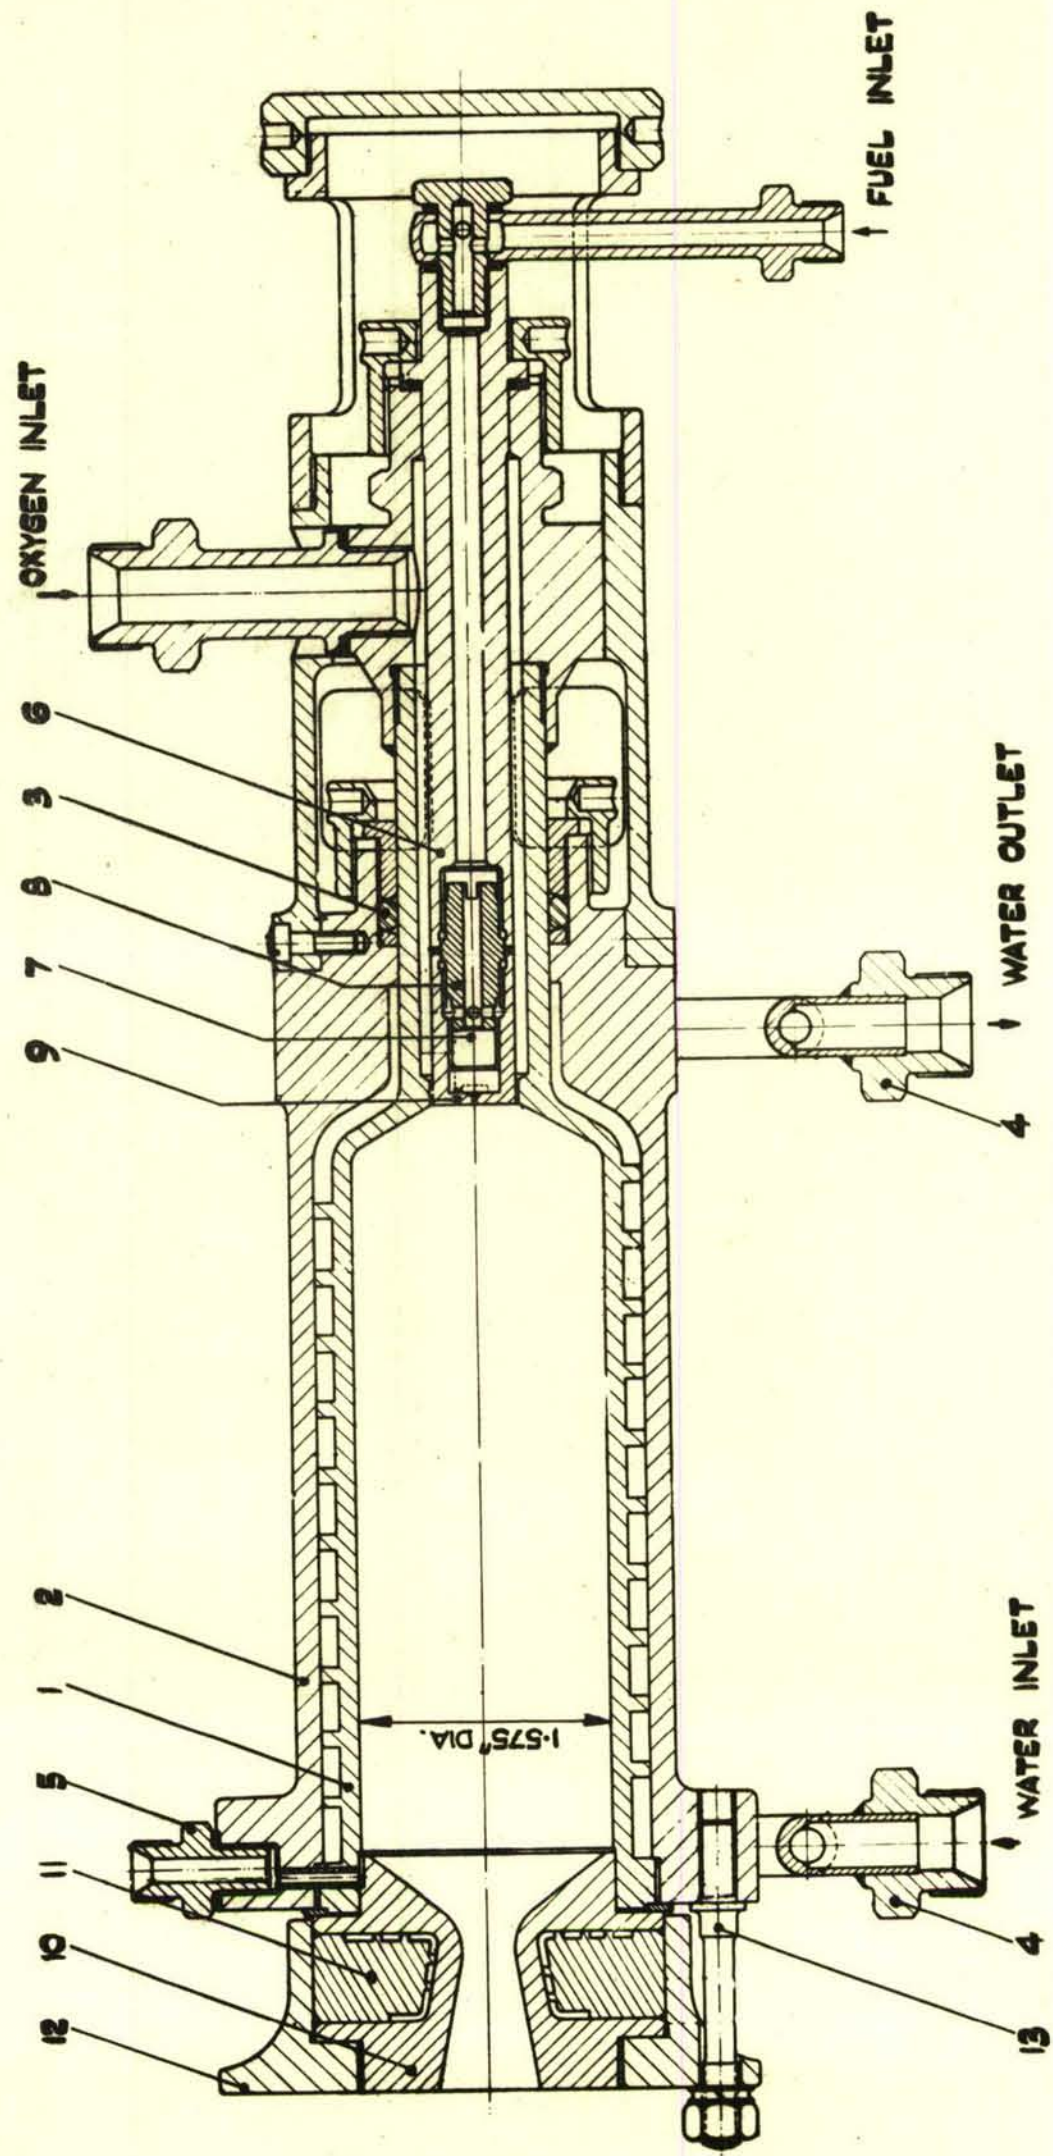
EXPERIMENTAL ROCKET MOTOR. R.M.I.
